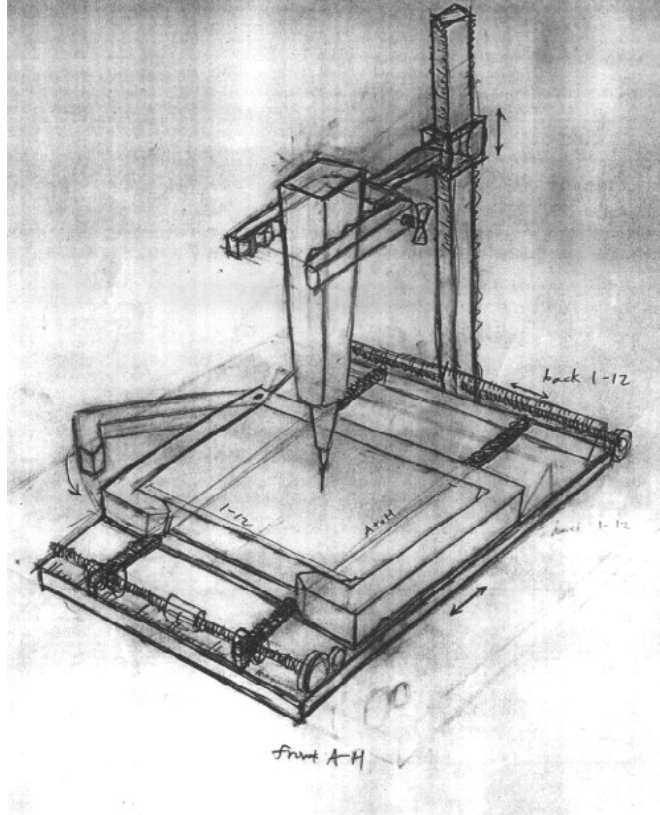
Sketch of the first design solution for the stand. This design's main features include movement in all three dimensions, and the ability to read the placement of the probe in the front due to gearboxes.
